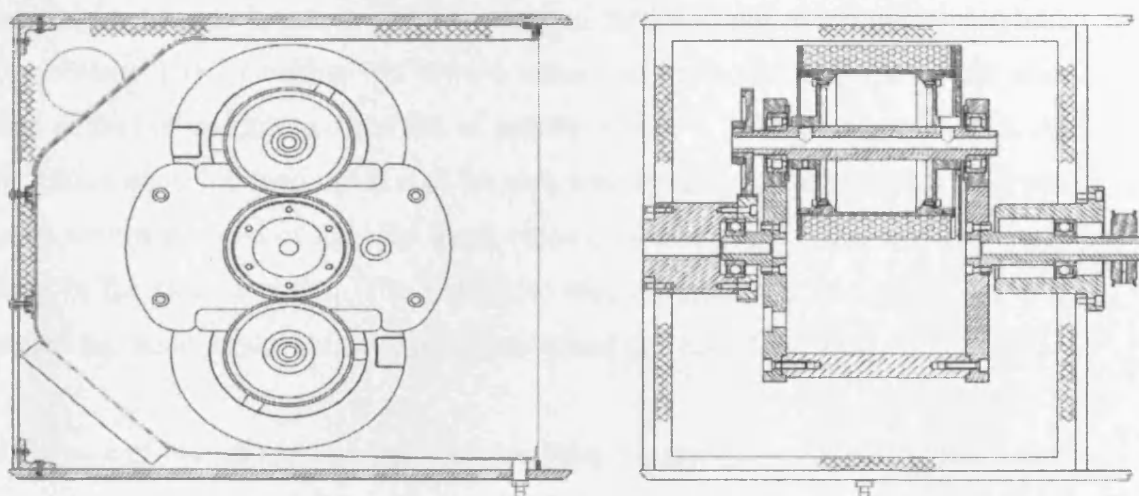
2 Bobbin machine with drive shaft replaced by two half shafts [Wood, 2002].
